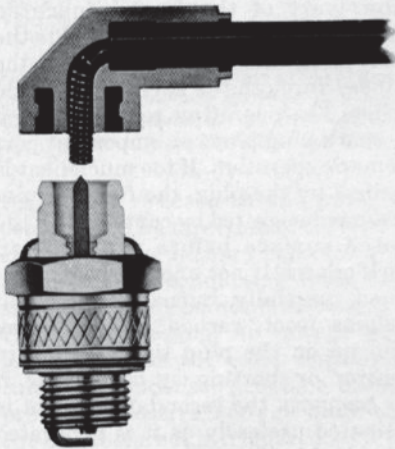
Cut-away view of special "shorty" type spark plug and terminal available for chain saw engines. Refer to Fig. CS35 for a second type special plug.
